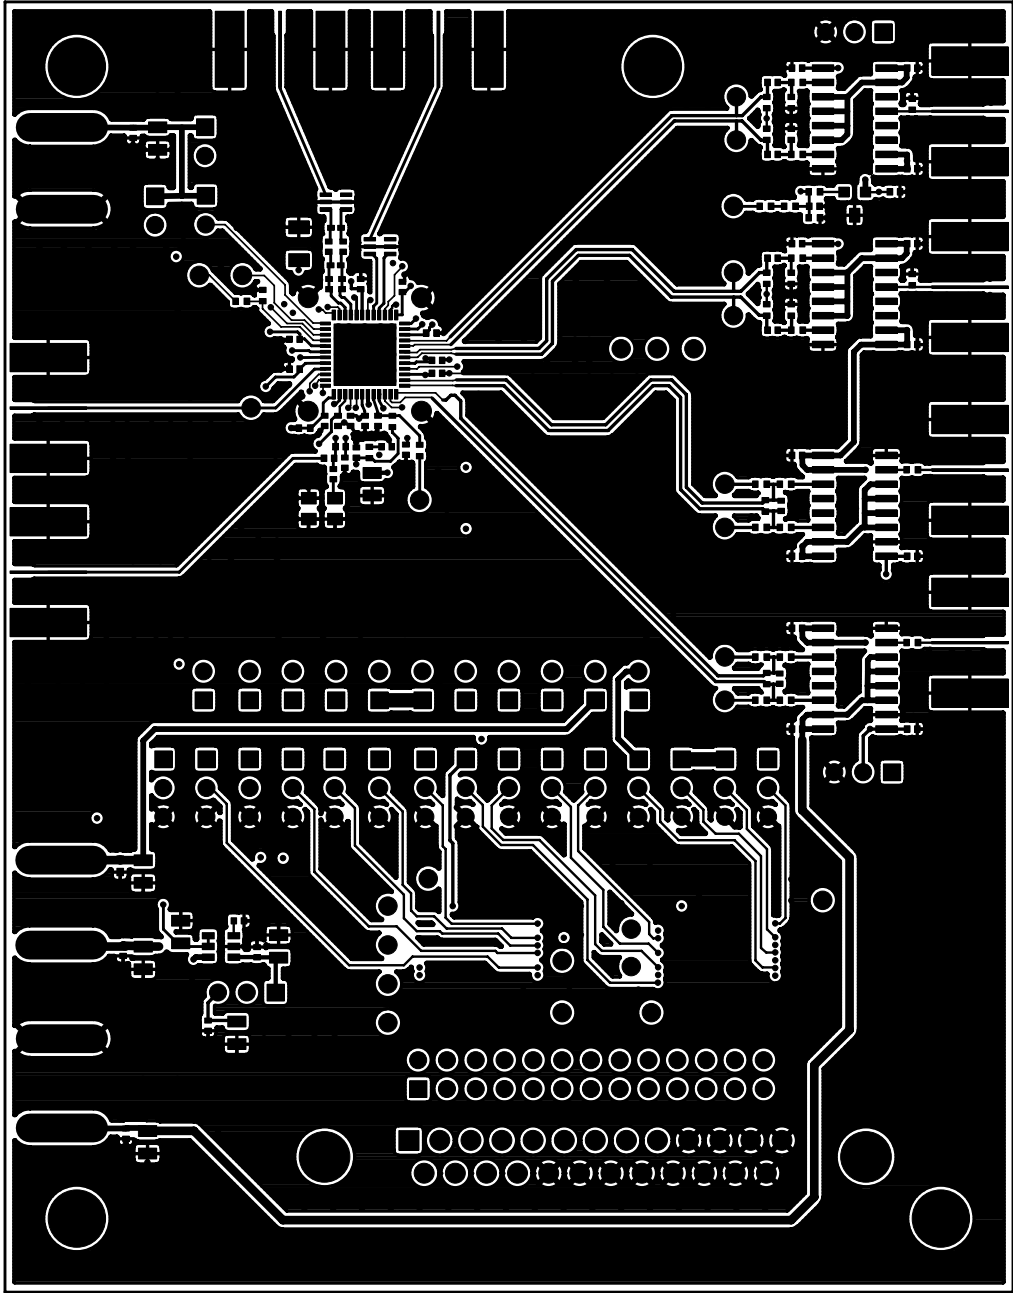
MAX2831 EV Kit PCB Layout—Component Side
